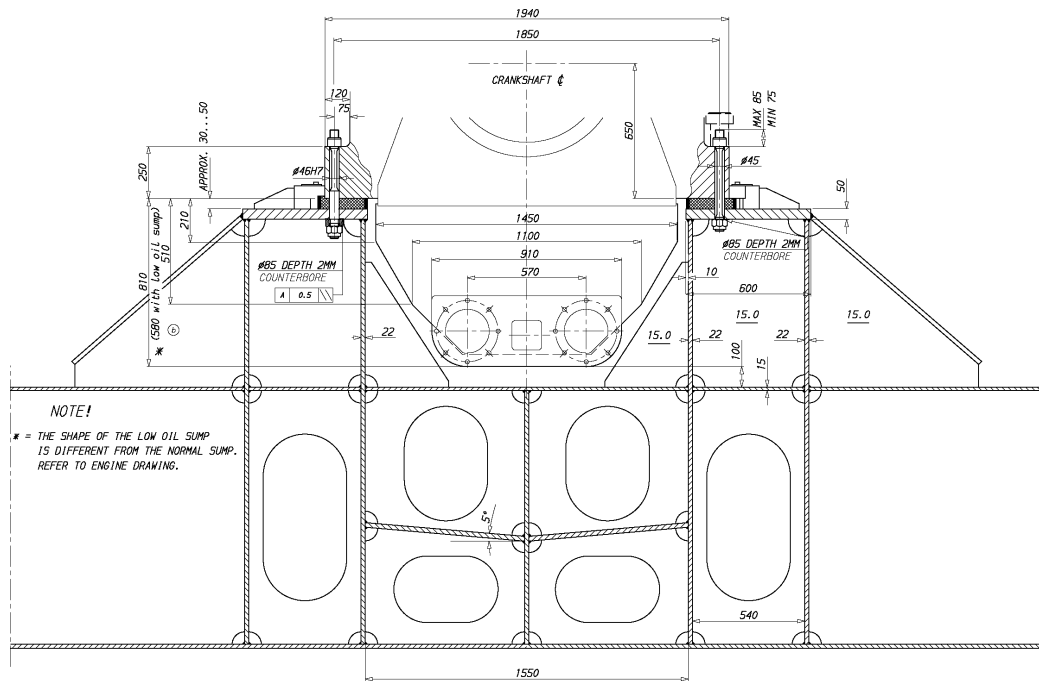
Seating and fastening, rigidly mounted V-engines on steel chocks (1V69L1659a)
